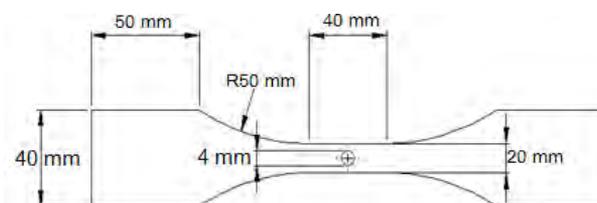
Shape and dimensions of fatigue test specimen with a 4-mm diameter hole
